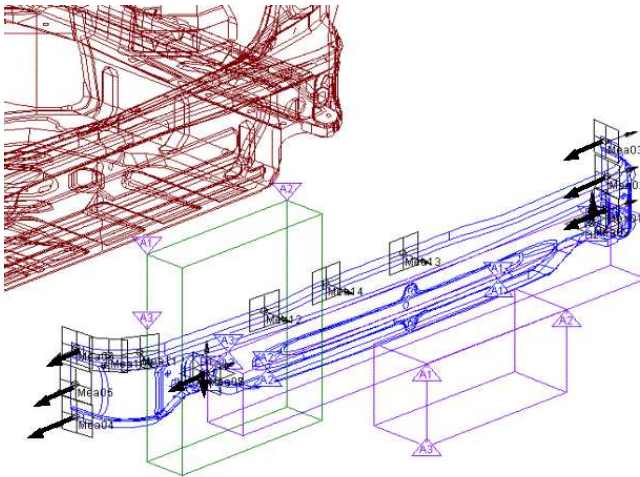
The first designated component, bumper assembly. Contains 38% of the variation.
